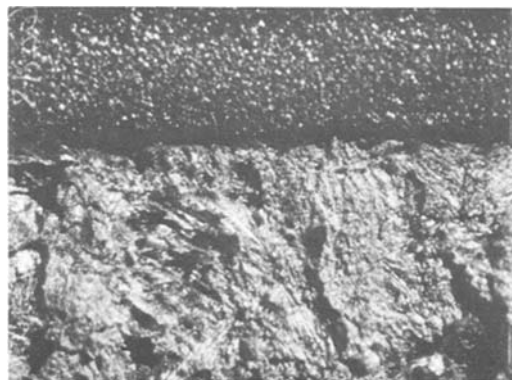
Fracture surface of a bend specimen showing a dendrite pattern. The upper region is the spark machined notch. (X20).
